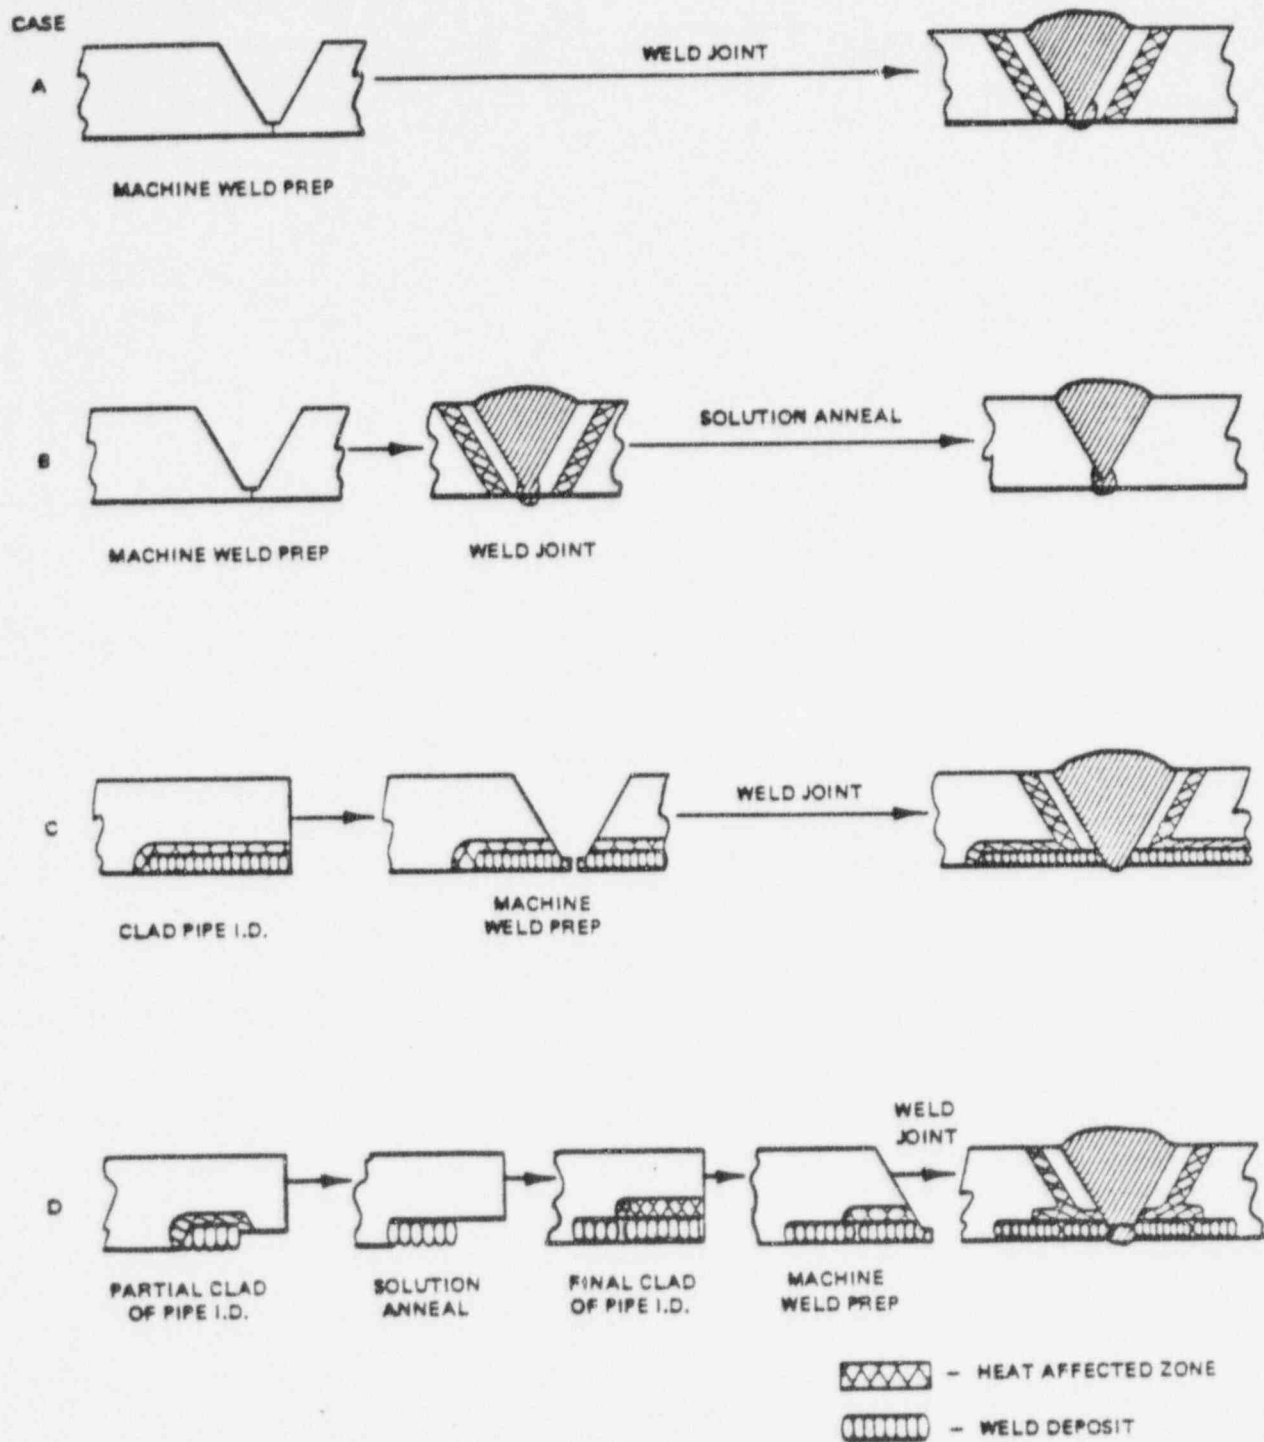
Schematic Showing Sequence of Fabrication Operations and Location of Heat-Affected Zones in Type-304 Stainless Steel Pipe Base Metal for Reference Welds (A), Solution Annealed Welds (B), Corrosion Resistant Clad Welds (C), and Annealed Corrosion Resistant Clad Welds (D)
